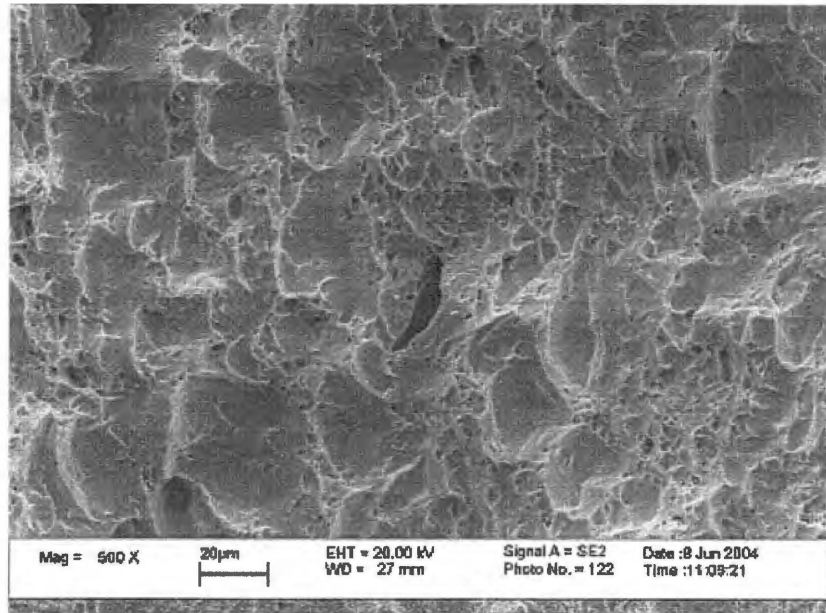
Scanning Electron Microscopy of an undoped Zircaloy-4 specimen (A-Zr-1-3) fracture surface showing spherical dimples resulting from uniaxial tensile loads and a secondary crack
